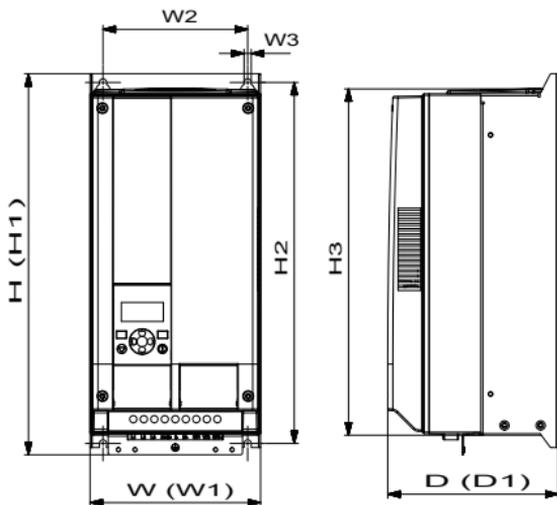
Vacon 20 dimensions, MI4 - MI5
